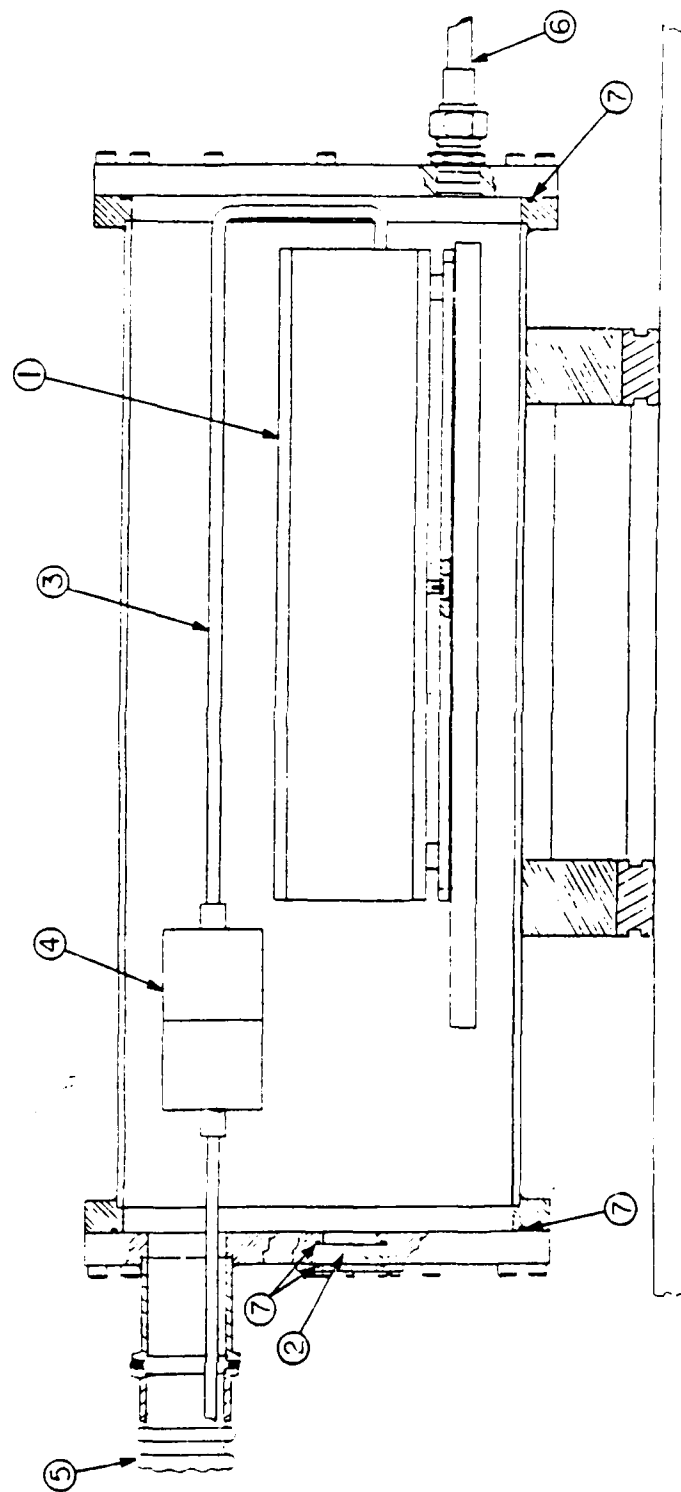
Reference Laser Pressure Enclosure. (1) Reference laser, (2) output window, (3) electrical cables, (4) cable connector, (5) flexible coupling to outside of vacuum chamber, (6) cooling line, and (7) O-ring seals
